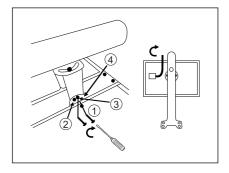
Match the No. 5 hole of the U-shaped bracket to the No. 1 hole of the lamp bracket, and the No. 6 hole to the No. 2 hole of the lamp bracket. Then tighten it with 2 external hex screws.
